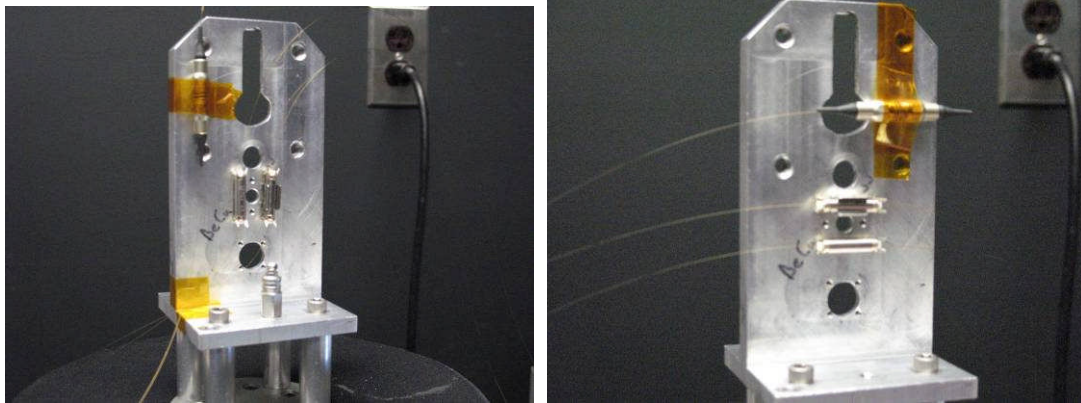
Fixture used and assemblies attached to the vibration shaker for the random vibration testing. The pictures show the positions for the X and Y configuration tests.
